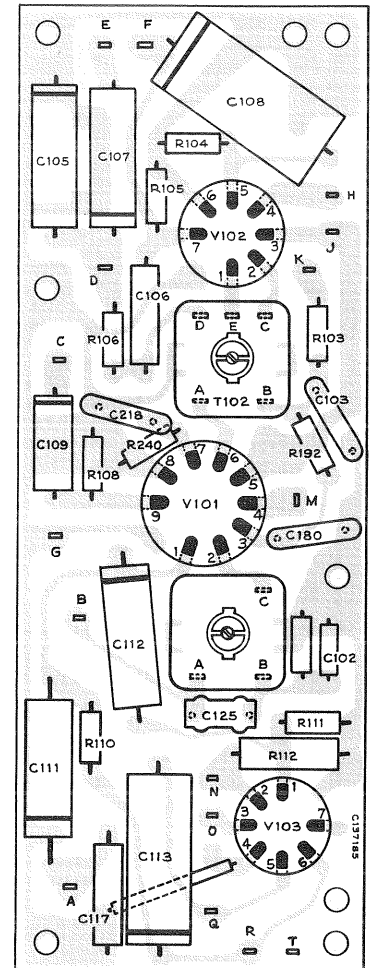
PC101 Sound I-F and Audio Assembly Layout
